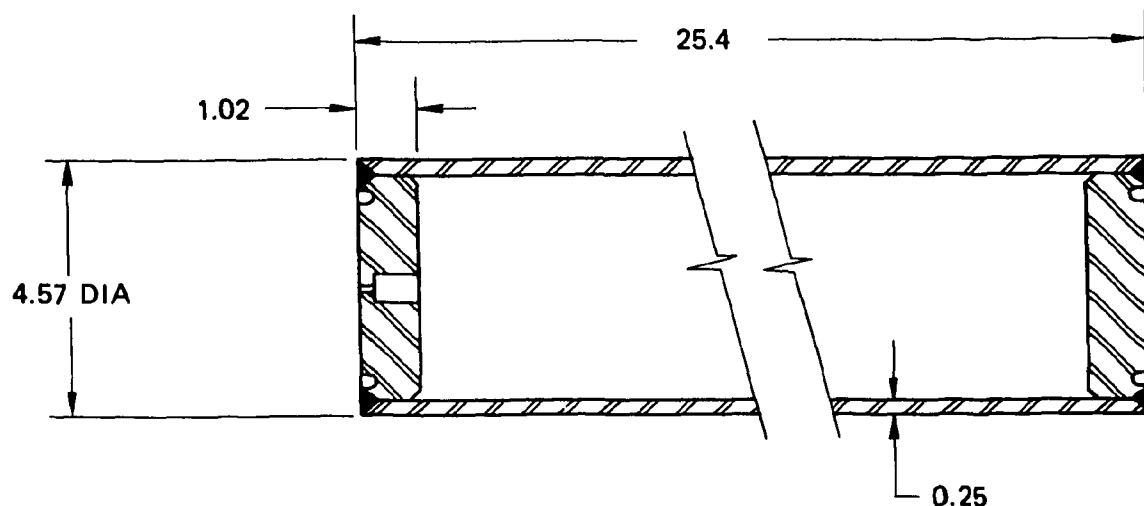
Pressurized tube design; all dimensions are in millimeters.
